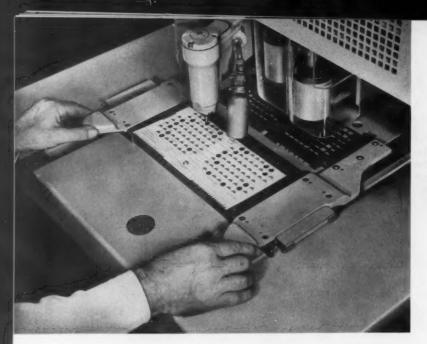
Carriage of special press, equipped with holders for the cardboard template (center) and the steel card directly behind it, is moved into position for punching.
